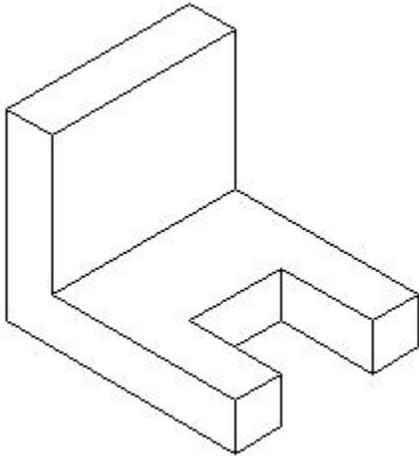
Place the Southwest Isometric View into the Drawing
